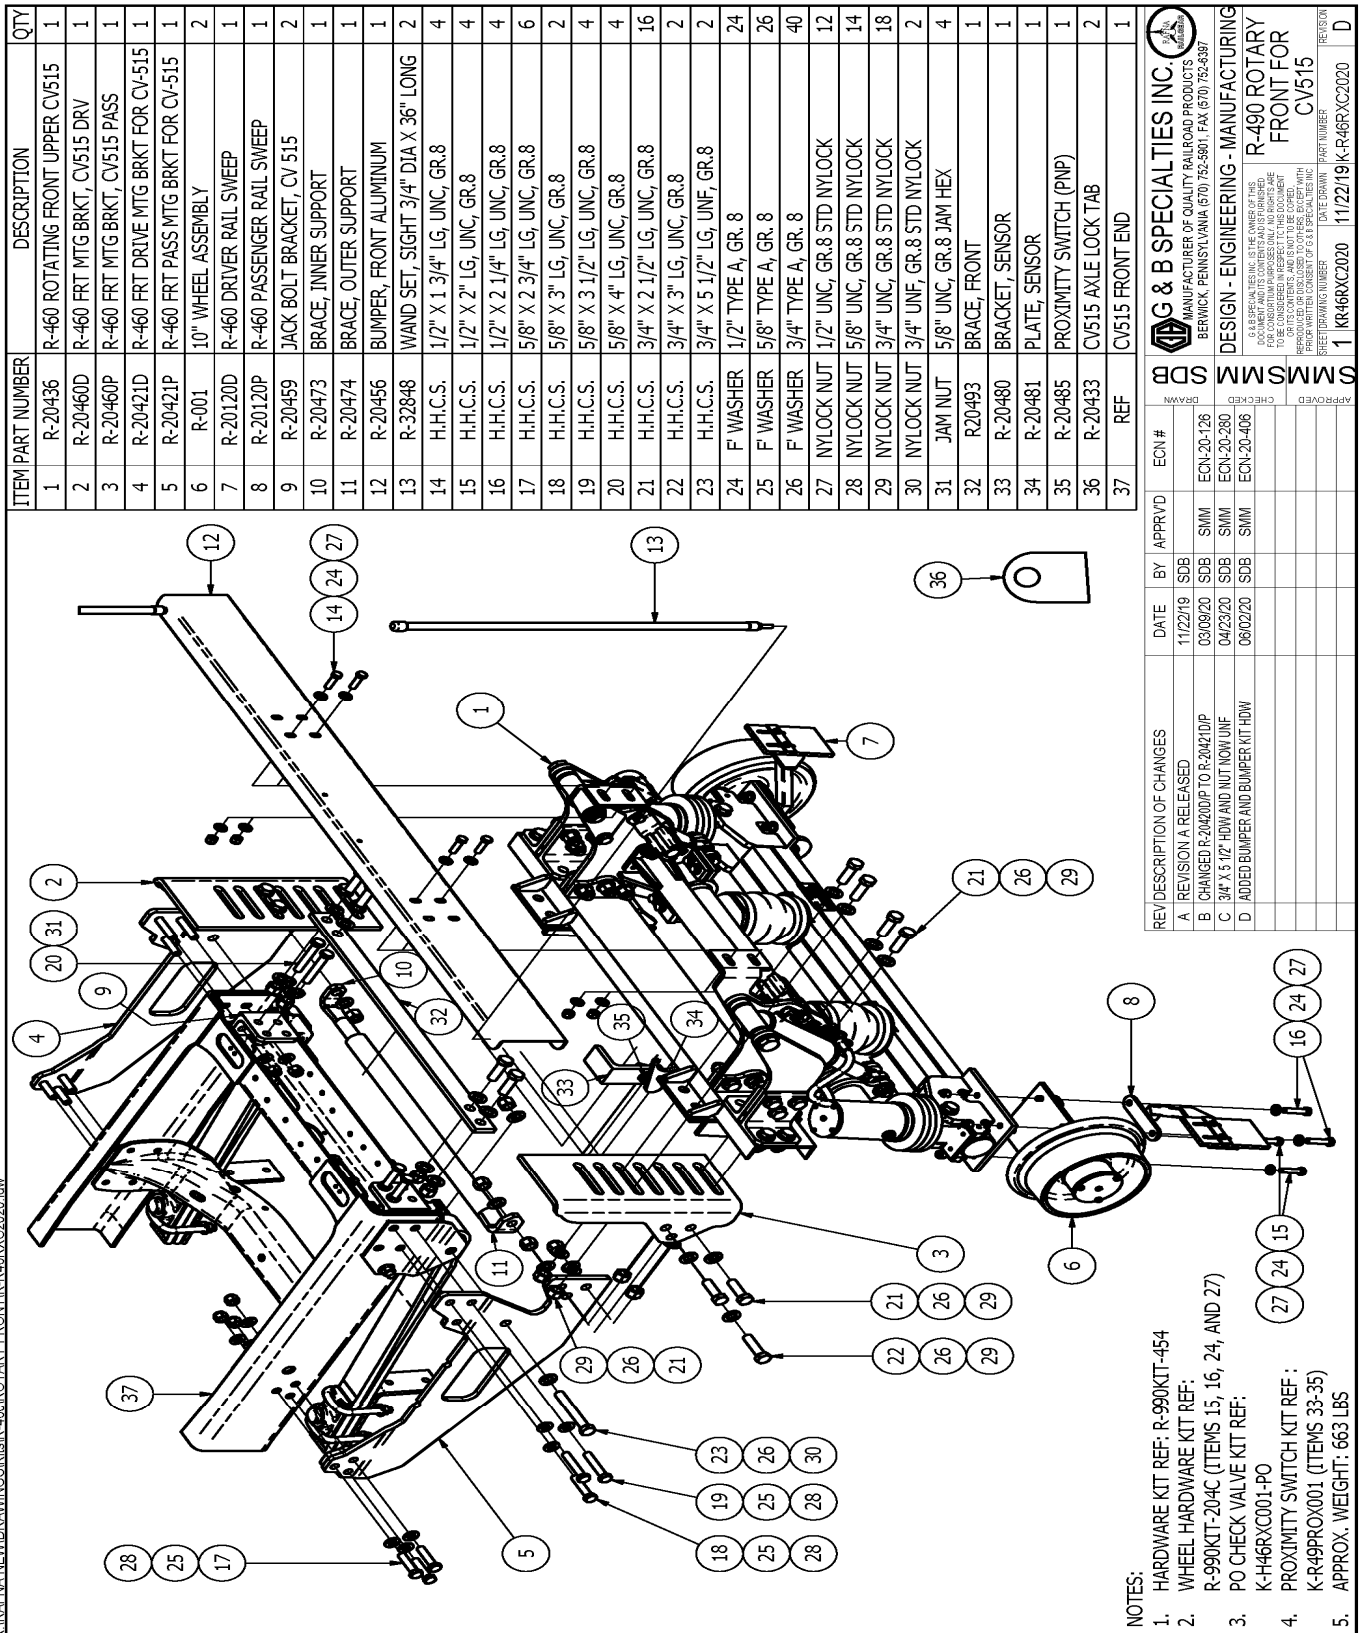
R-490 Rotating Front Railgear for CV515 Installed on Frame (K-R46RXC2020)
